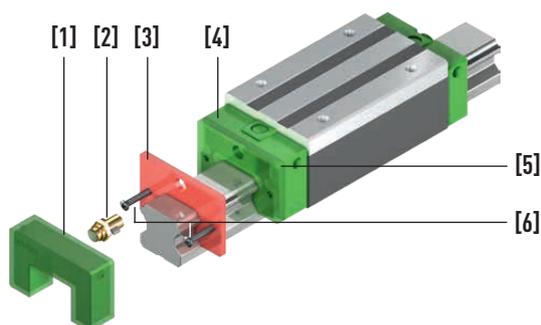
Exploded view of self-lubricating E2 block for the HG, EG and RG series
